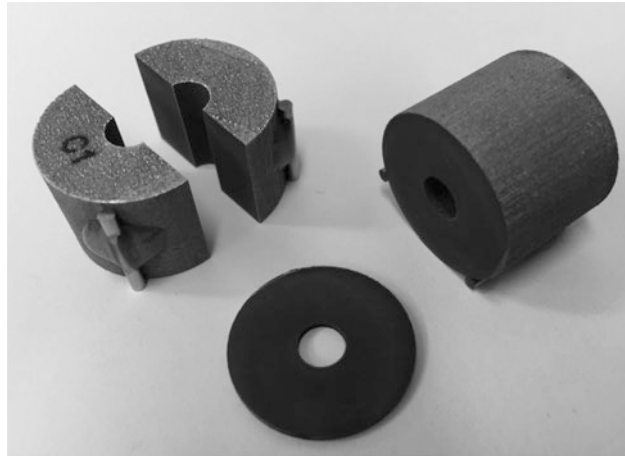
L-PBF cylinder C1 in 316L following exploratory residual stress measurements
